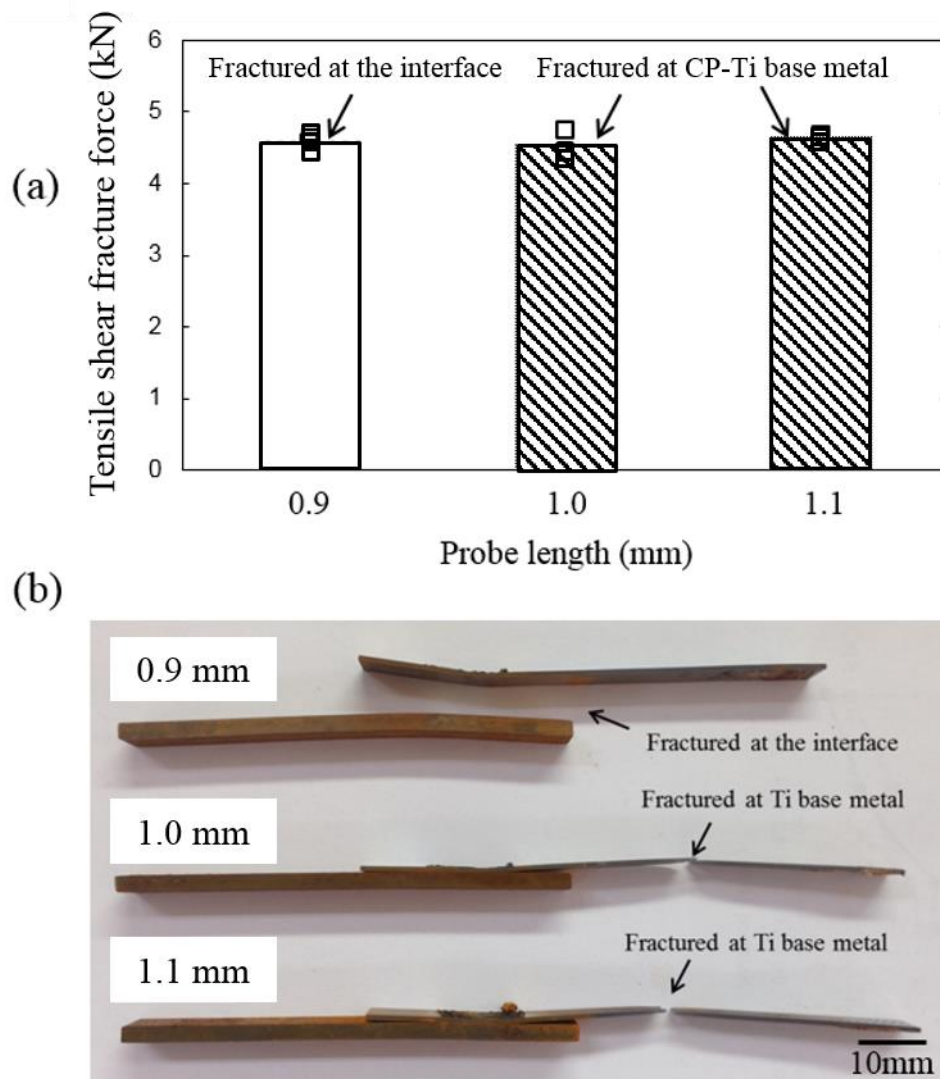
(a) Tensile shear fracture force and (b) side view appearances of the lap joints of CP-Ti and SPCC with different probe lengths of 0.9, 1.0 and 1.1 mm at the same welding parameters of 100 mm/min, 350 rpm and load 9.8 kN.
